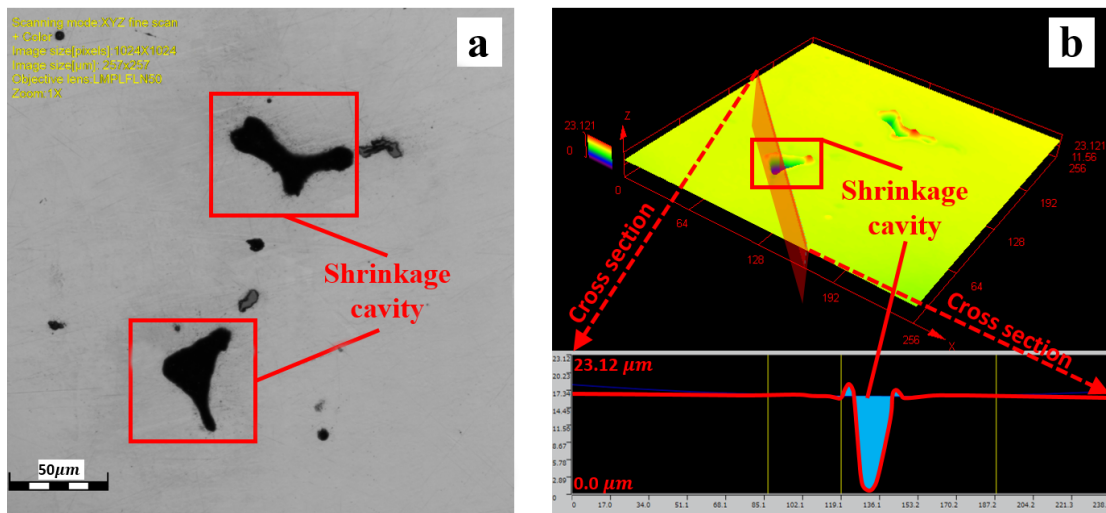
Shrinkage cavity in weld center a) 2-D view under optical microscope, b) 3-D view under laser scanning microscope
